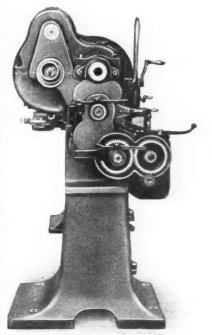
End View of Lathe showing Feed Gearing Connections.
